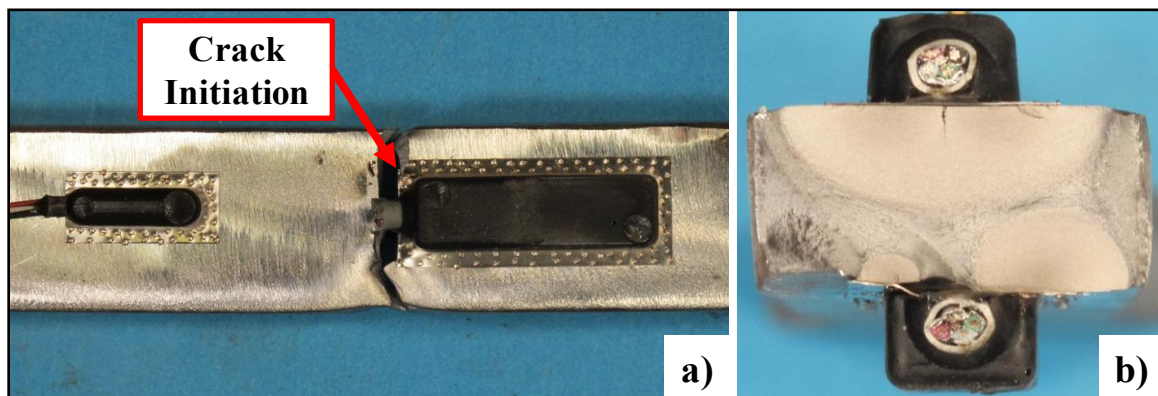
Typical fatigue failure for weldable gages (LEA-L, LEA-R), a) plan view, b) cross-section
